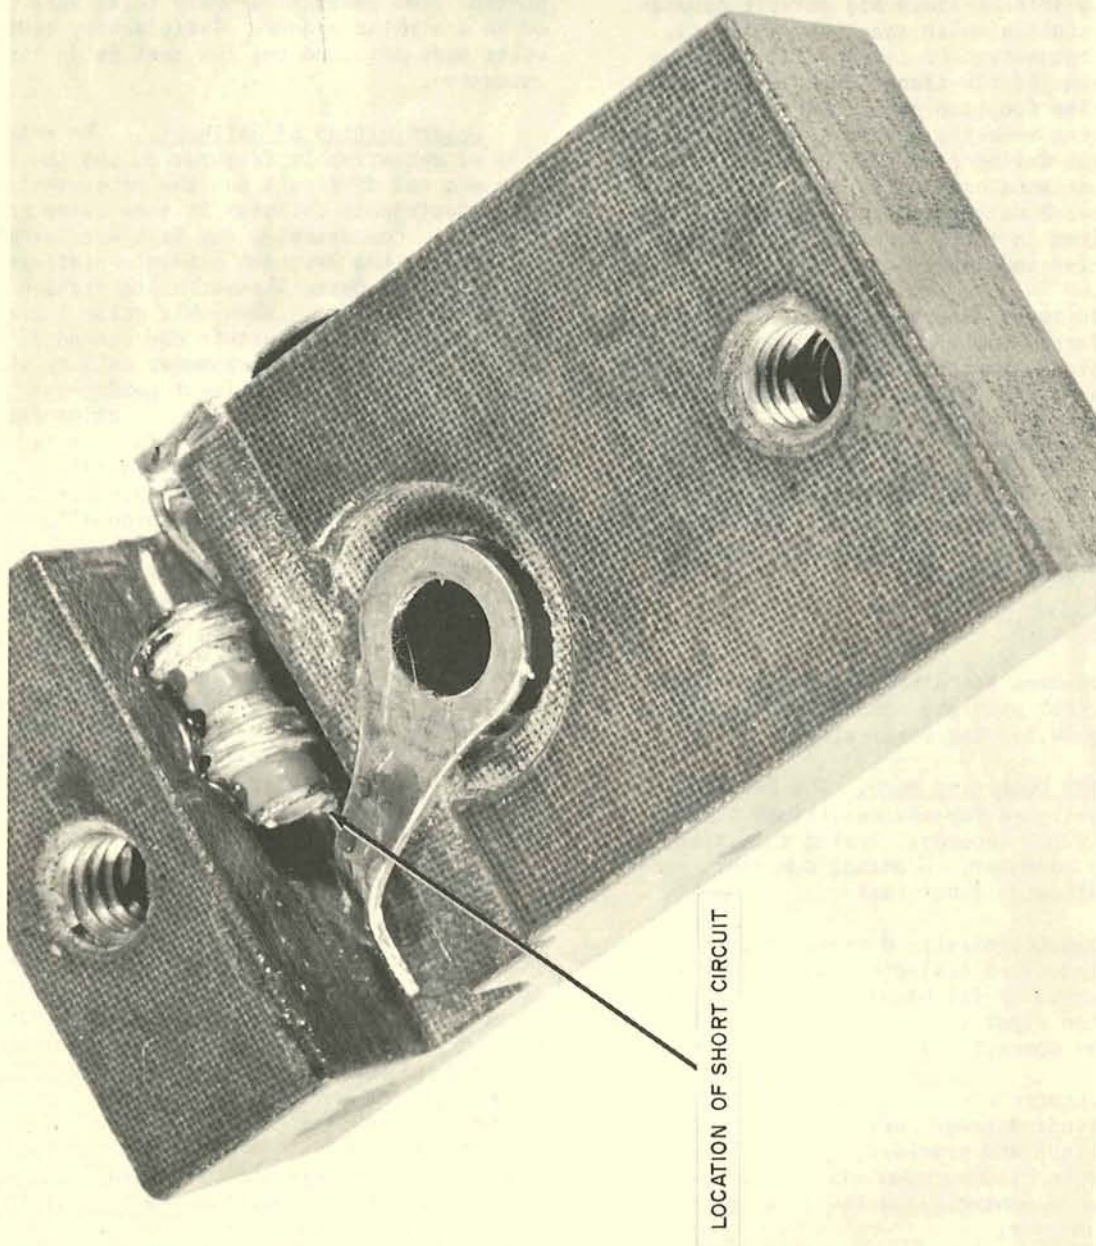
CAPACITOR BLOCK ASSEMBLY, MANUFACTURING DEFECT
